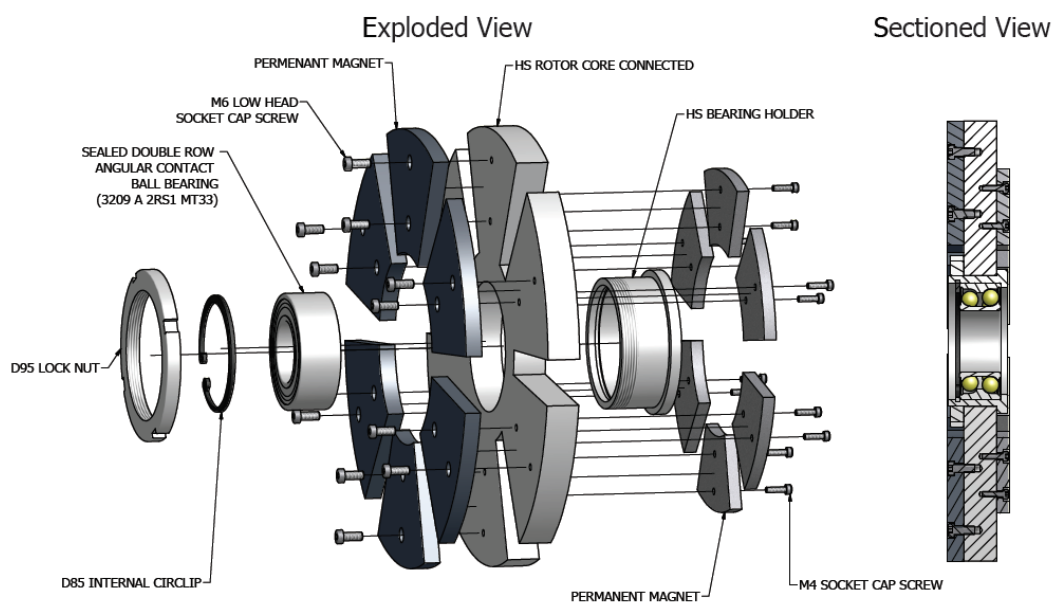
High-Speed Rotor with Exploded and Sectioned Views (Magnetically Coupled)
